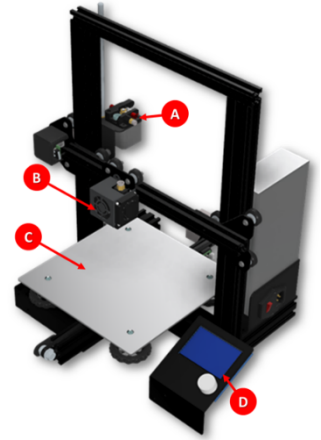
Specifications of Ender™ 3 Pro FDM-type 3D-Printer, which is equipped with a (a) material feeder/extruder, (b) high-temp nozzle deposition unit, (c) heated build platform, and (d) on-board controller interface.
